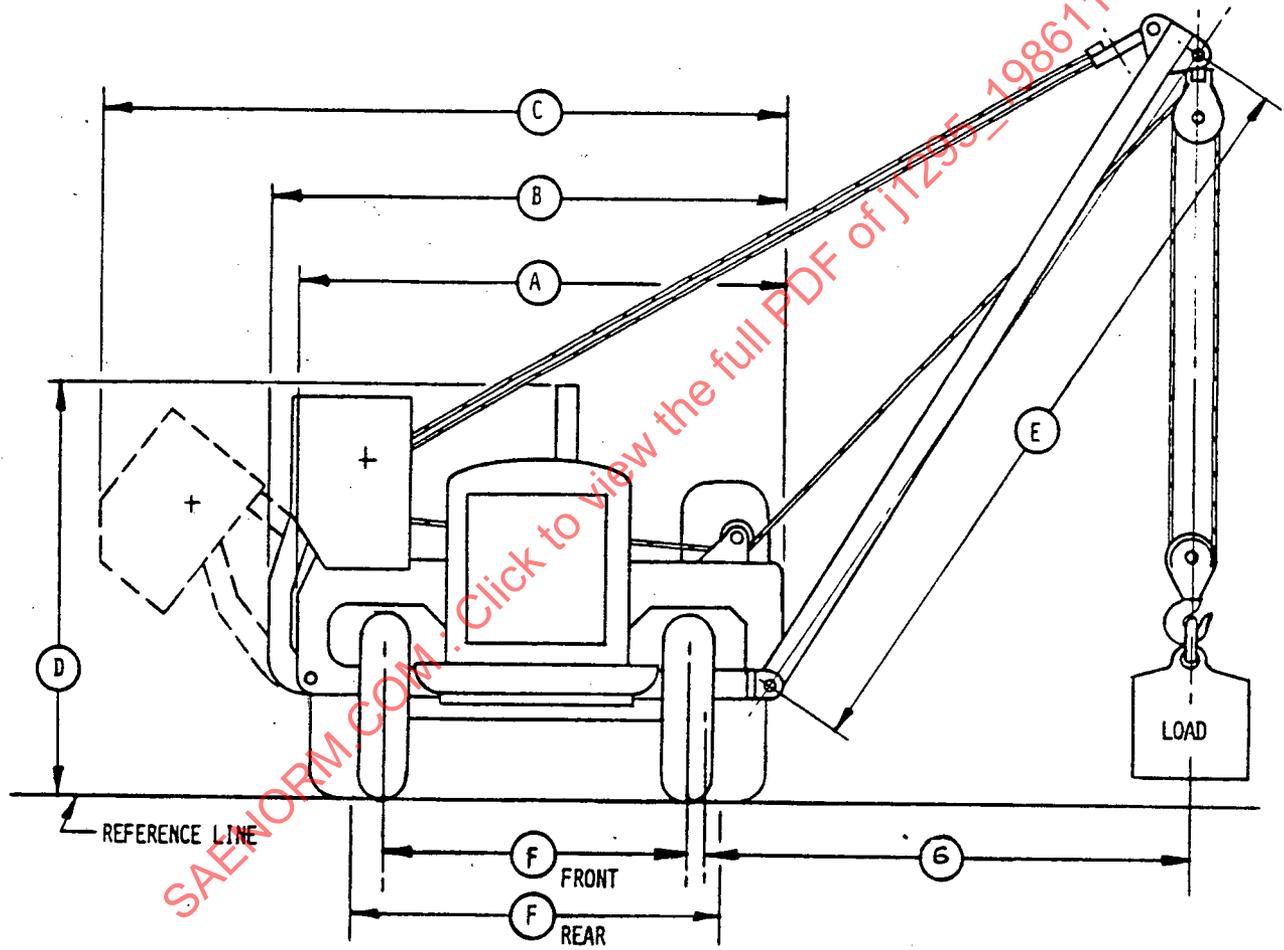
WHEEL TRACTOR STEERED STRAIGHT
